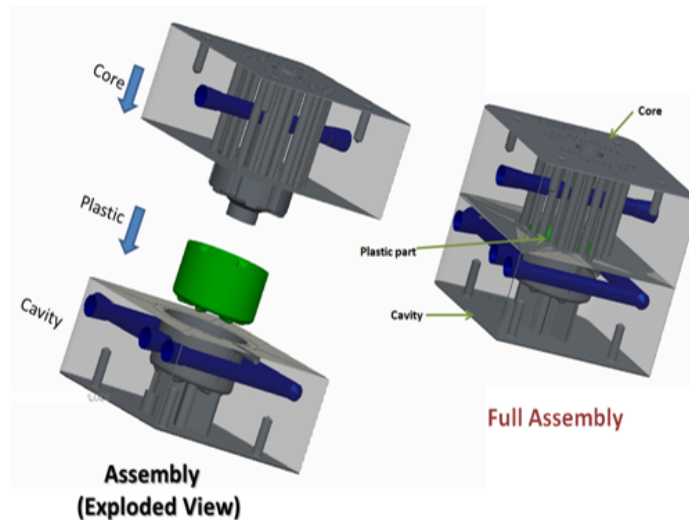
CAD model of full mold from Hewitt Molding.
